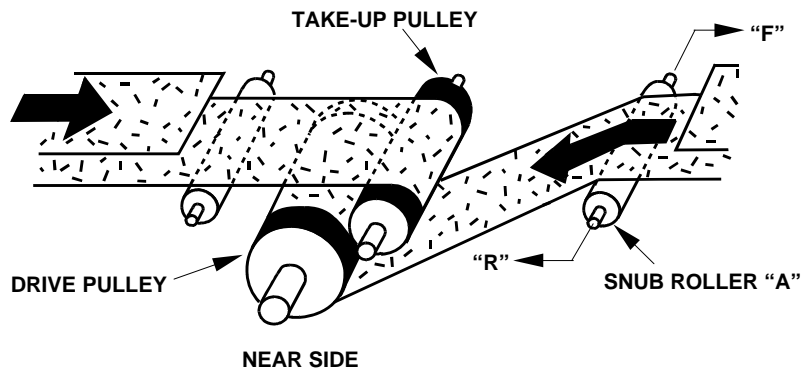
Adjusting Upper Bend Roller for Tracking Upper Run of Belting
